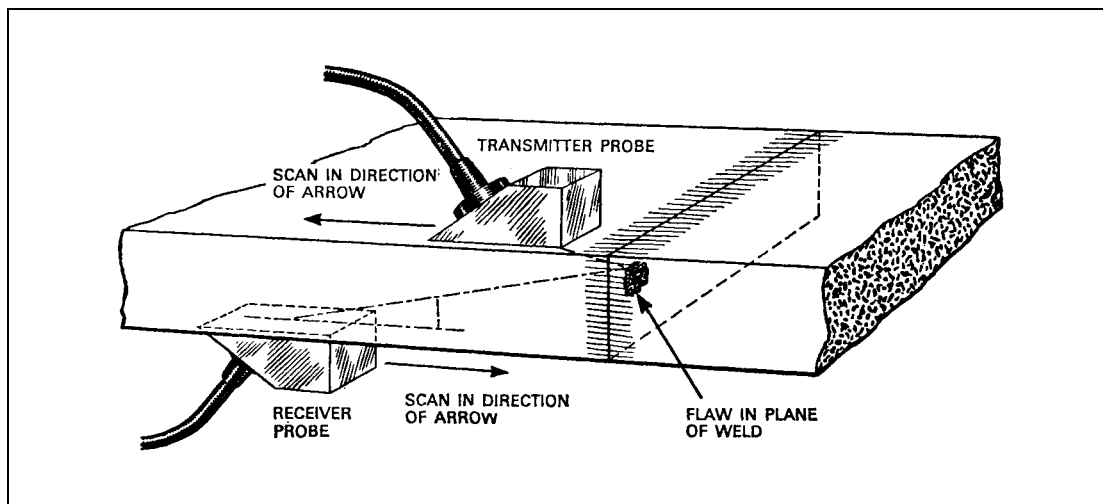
Scanning Method for Finding Flaws in Flash Butt Welds
